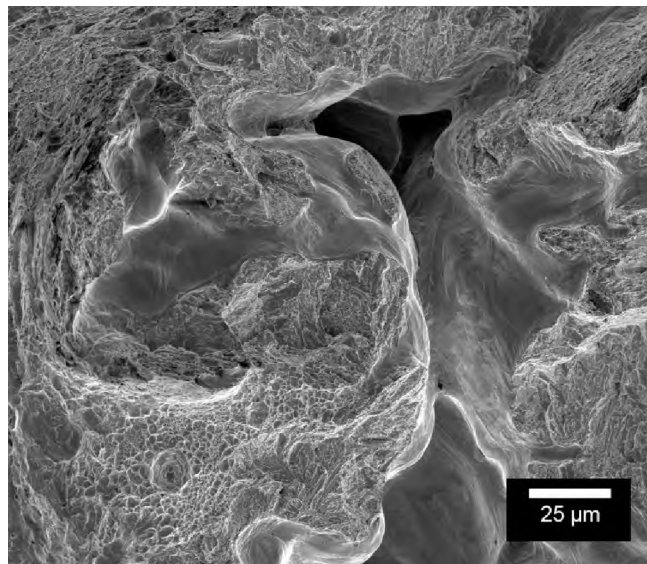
Secondary electron image of a high strength steel fracture surface near shrinkage porosity. A ductile fracture mode of microvoid coalescence is observed near the pore. This steel was induction melted using vacuum arc remelted forging stock and cast into preheated ceramic investment molds.
